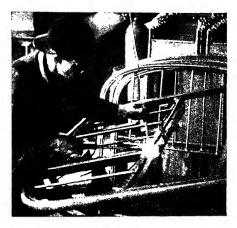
Bronze-welding is extensively used in the manufacture of metal furniture.
